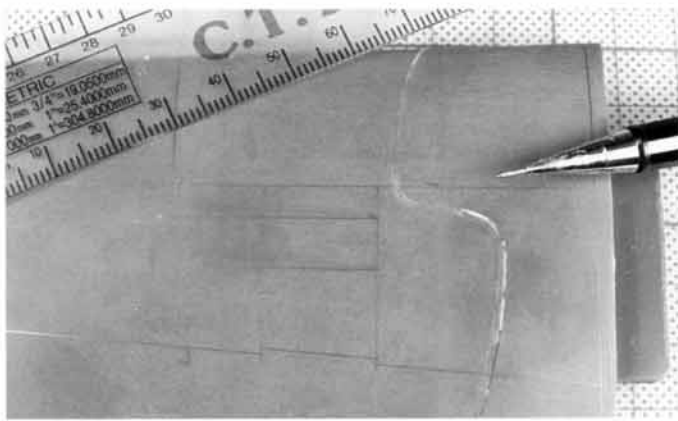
The first step in scribing outlines for multiple box-shaped access panels is to draw the shapes on the wing.
